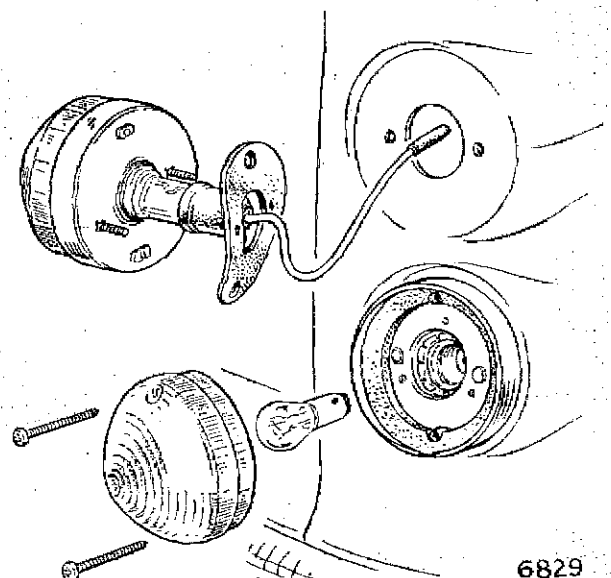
Exploded view of stop/tail and rear flasher lamps
